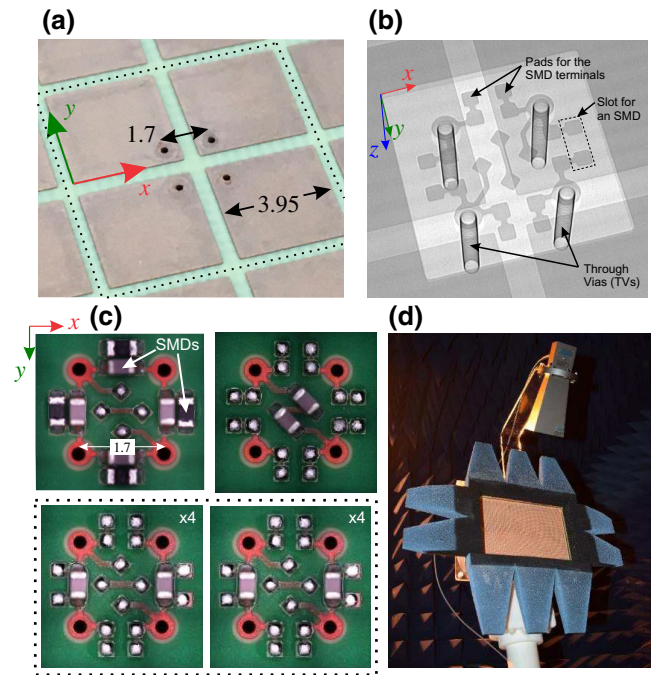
The fabricated samples and the measurement setup. (a) A photograph of the fabricated sample (top side). (b) An x-ray view verifying the electrical continuity between the patches, through vias and SMD pads. (c) The SMD components assembled on the back side for the three different scenarios schematically depicted in Figs. 1(d)–1(f): top left,  $RC_y = 22 \Omega \parallel 2.7 \text{ pF}$  and  $RC_x = 100 \Omega \parallel 0.8 \text{ pF}$ ; top right,  $C_d = 0.8 \text{ pF}$ ; bottom,  $C_1 = 0.8 \text{ pF}$  and  $C_2 = 2.7 \text{ pF}$ . (d) The measurement setup inside the anechoic chamber. The metasurface is mounted on the positioner head along with a horn antenna at a fixed angle.
